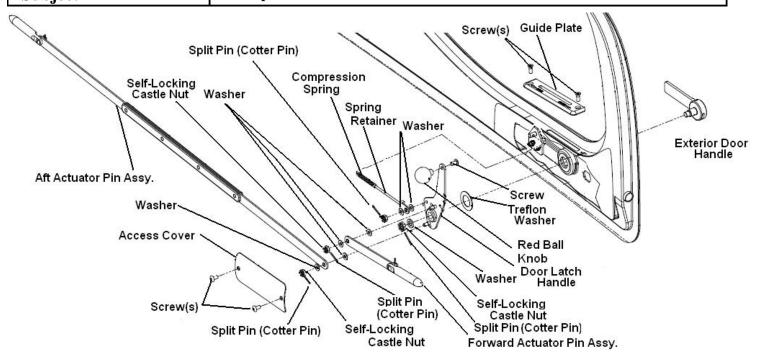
Door Latch and Pin Assembly (Port Side). Exploded view of the parts available for field replacement.
